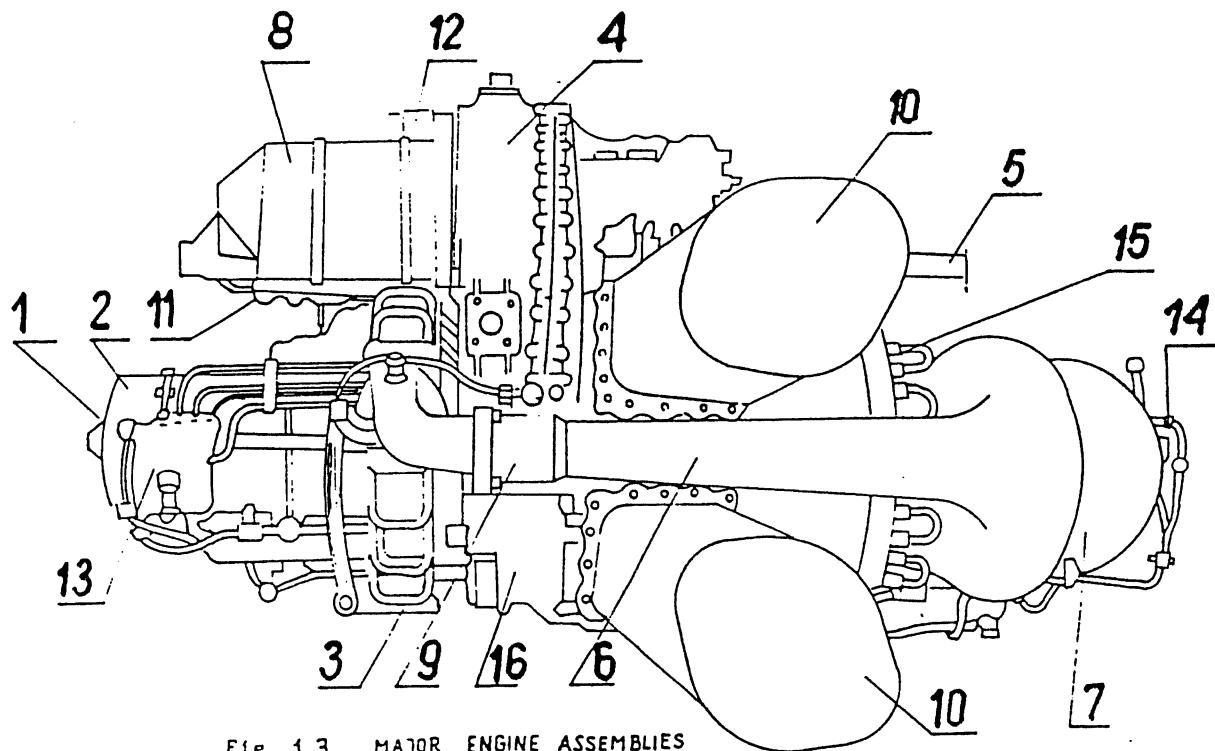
MAJOR ENGINE ASSEMBLIES
